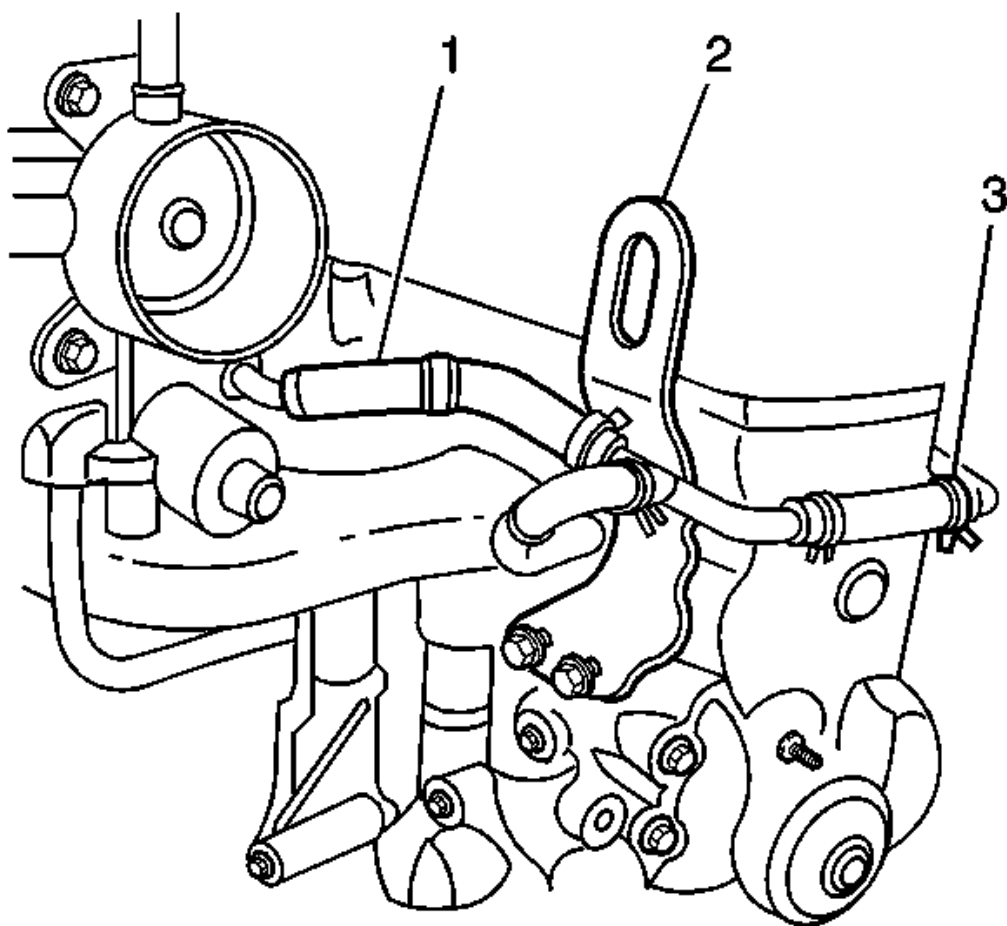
View Of Water Bypass Pipe Bracket & Hose
